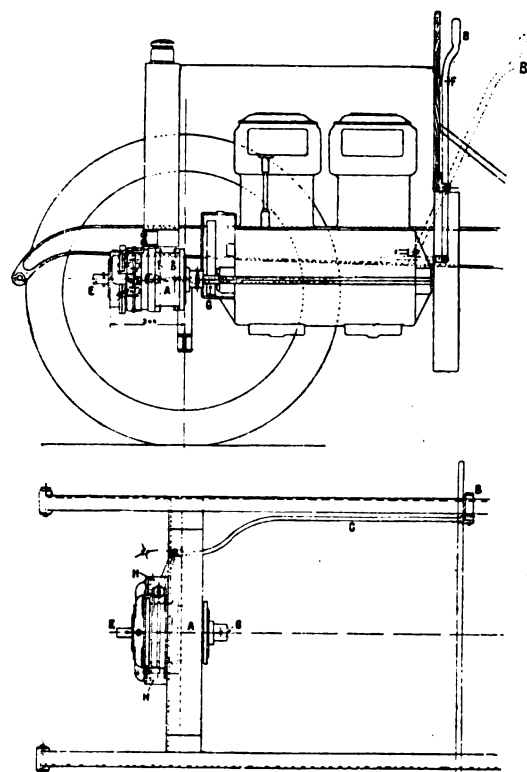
Sectional Elevation and Plan View of arrangement of Lemale Automatic Starter.
